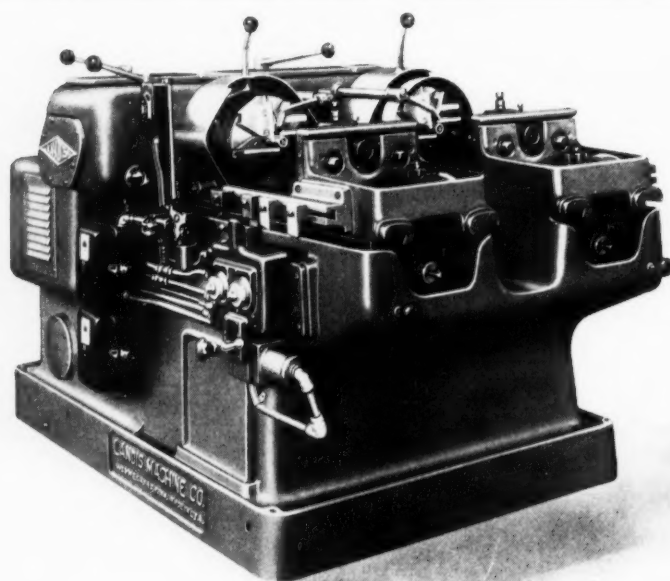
Lanhydro Turning Machine with Lanco Heads that are Provided with Turning Cutters
